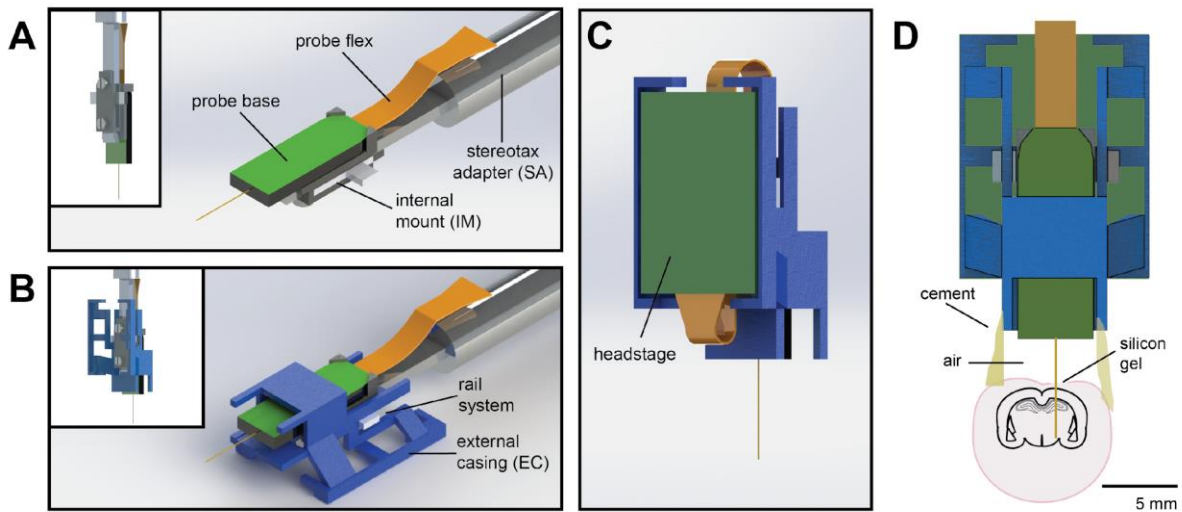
Schematic of Neuropixels AMIE. (A) Probe base mounted onto 3D printed internal casing and attached to machined metal stereotax adapter. *Inset:* Rear view, with screws that attach the internal mount (IM) to the stereotax adapter (SA). (B) Entire assembly in a 3D printed external casing. *Inset:* Rear view. (C) The headstage is positioned on the back of the encasing, with the flex wrapped in an "S" shape. (D) Entire assembly in relation to size of mouse brain and skull. The EC is attached to the skull with cement. Silicon gel is used to seal the open craniotomy.
